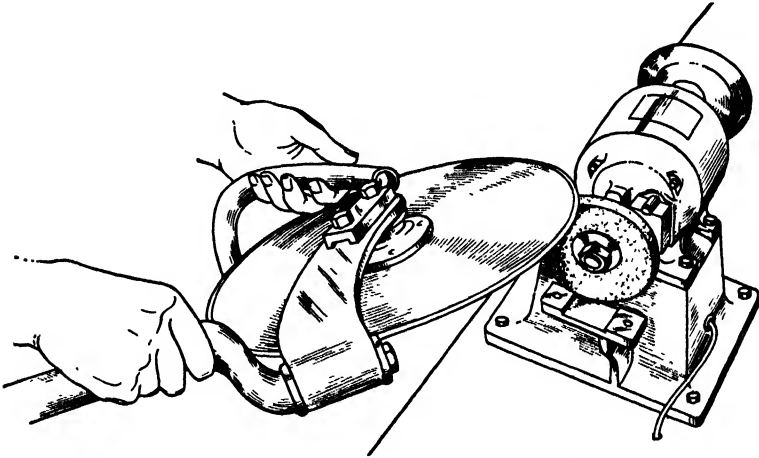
An excellent way to grind a coulter. Adjust the coulter bearing to turn freely and hold the coulter with the bearing slightly to one side of the grinding wheel.
